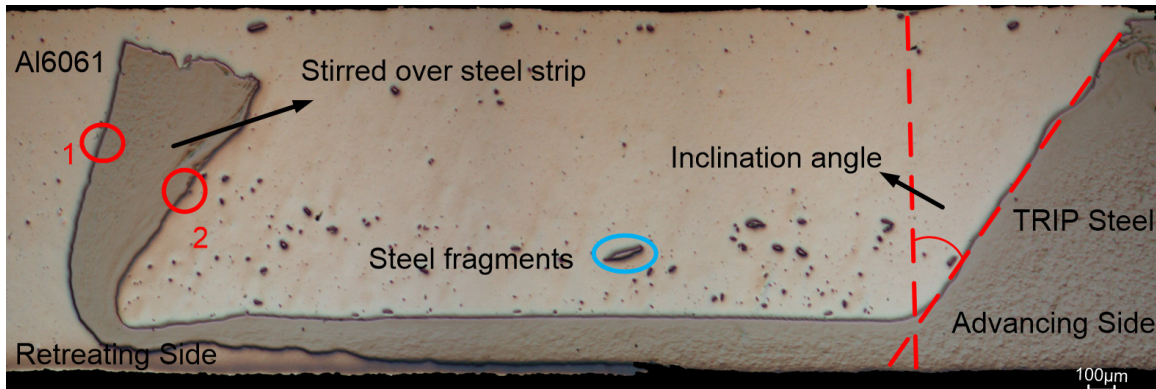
Macrostructure of the cross section perpendicular to the weld line (1800 rpm, 60mm/min, tool offset of 1.63mm)
